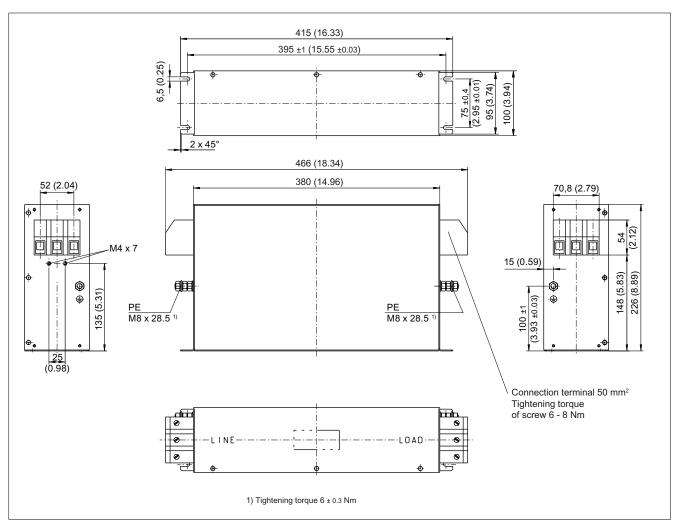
Dimension drawing of Basic Line Filter 55 kW, order number 6SL3000-0BE25-5DAx, all dimensions in mm and (inches)
